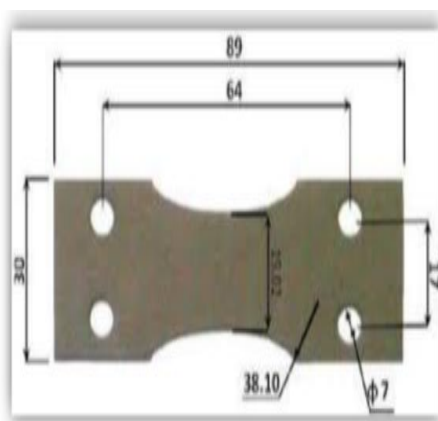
Fatigue specimens before the test (all dimensions are in mm) with a thickness of (4mm) according to D 3479/D 3479M-96 ASTM [19].
